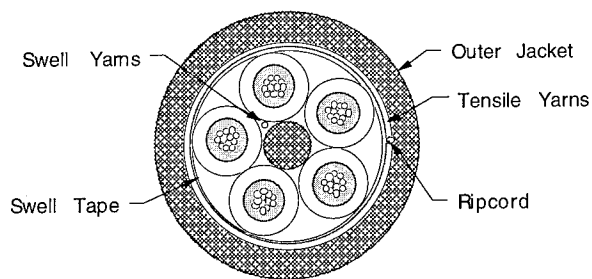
5 position duct Mini Bundle Dry cable cross-section
